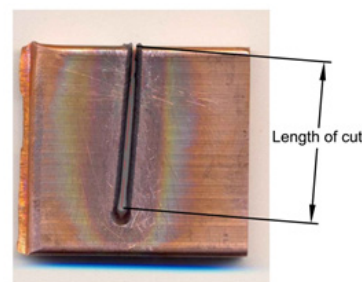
Cutting length measurement in copper workpiece scanned picture
